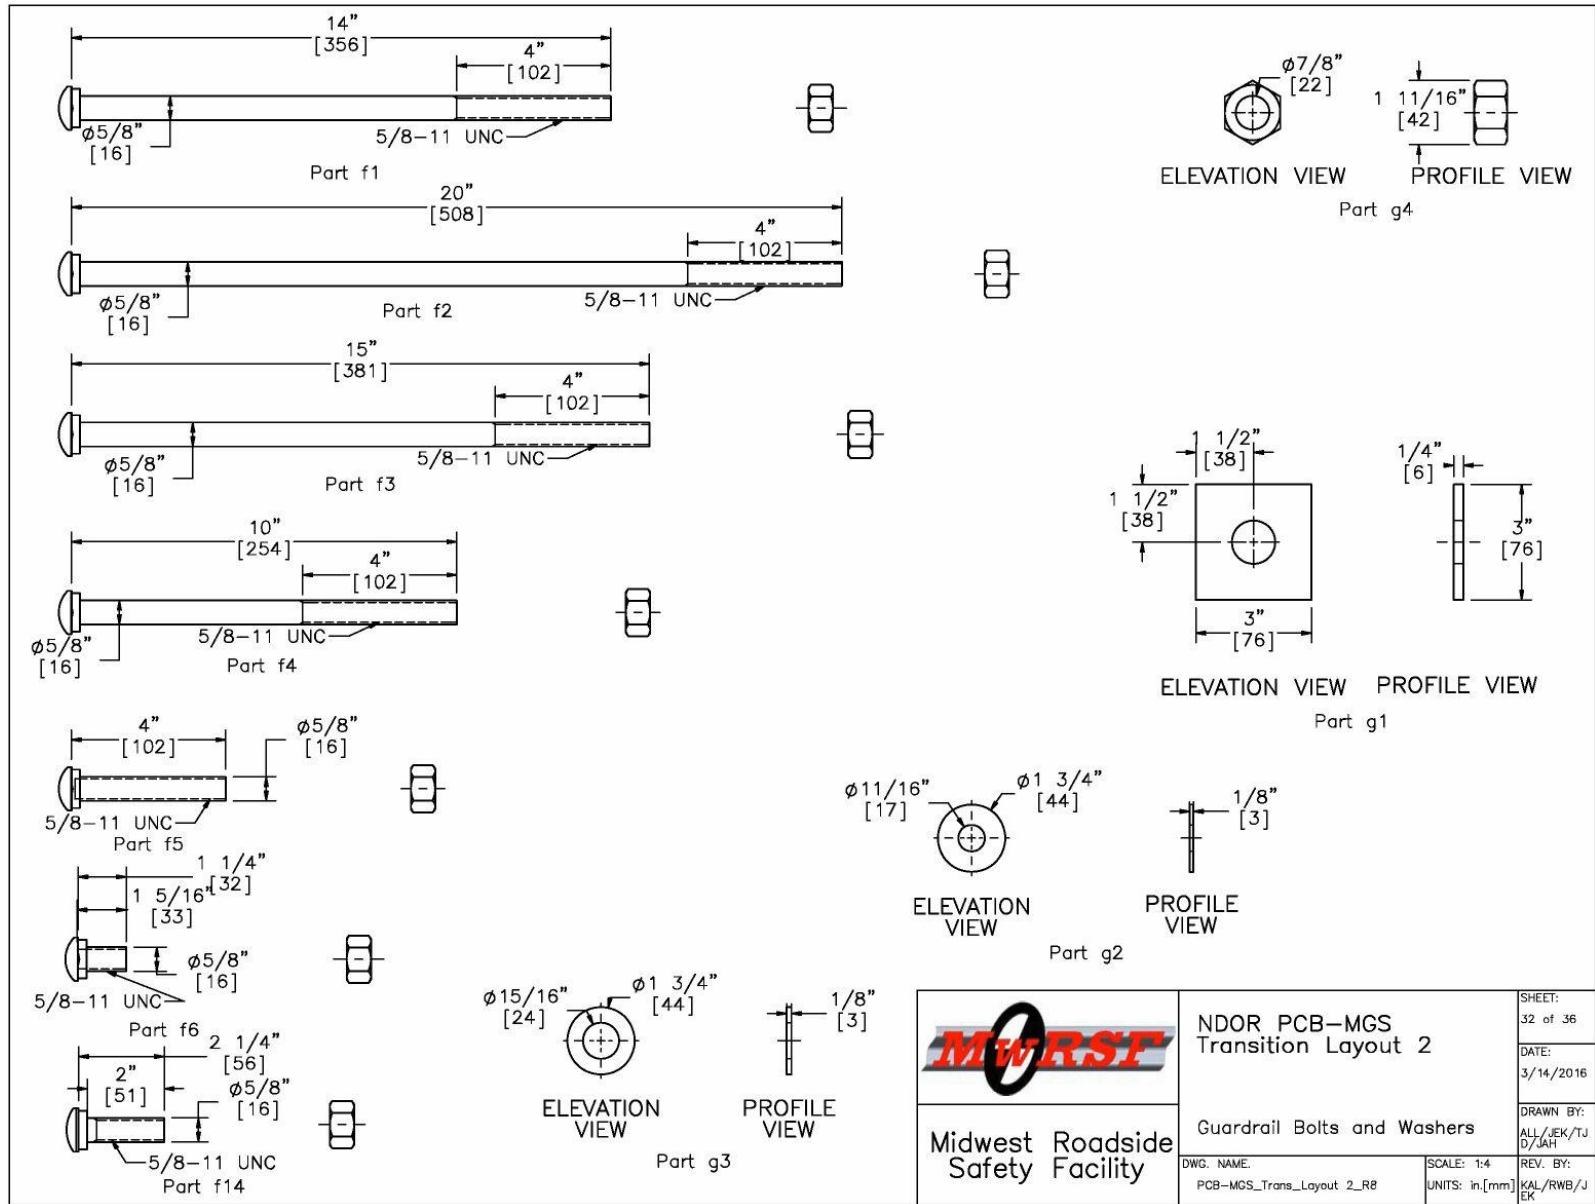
Guardrail Bolts and Washers, Test No. MGSPCB-1
